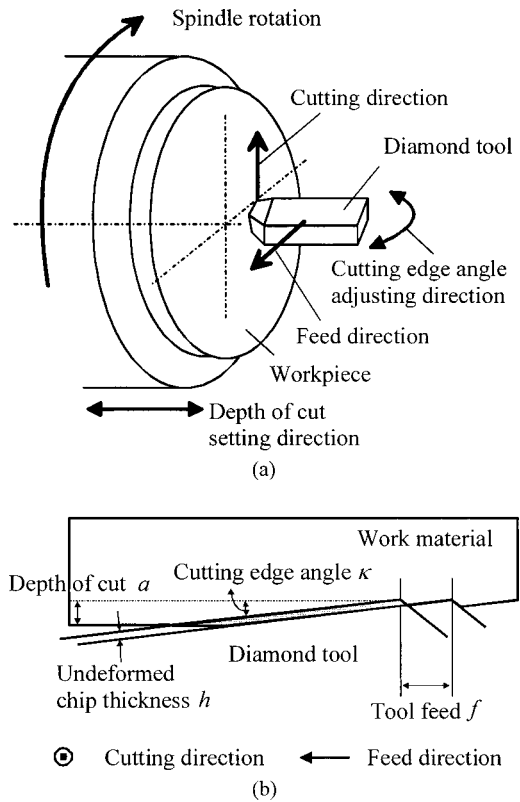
Schematics of (a) the single-point diamond turning setup and (b) the machining model.
